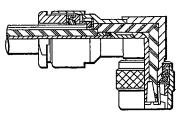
F-Assembly instructions-C Type plugs and sockets-Elbow plugs-Captive contact
